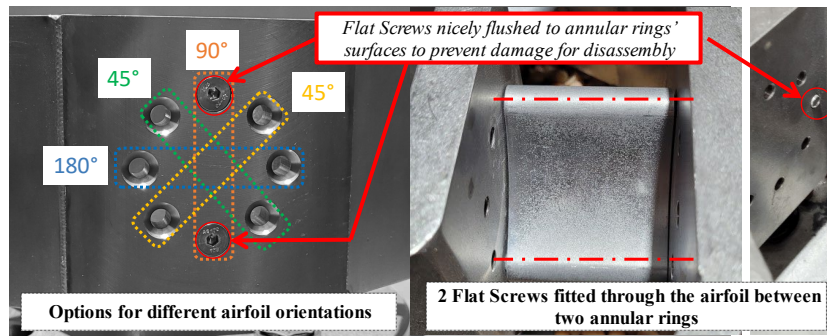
Actual assembly of airfoil between two annular rings using two M10 Flat head screws
